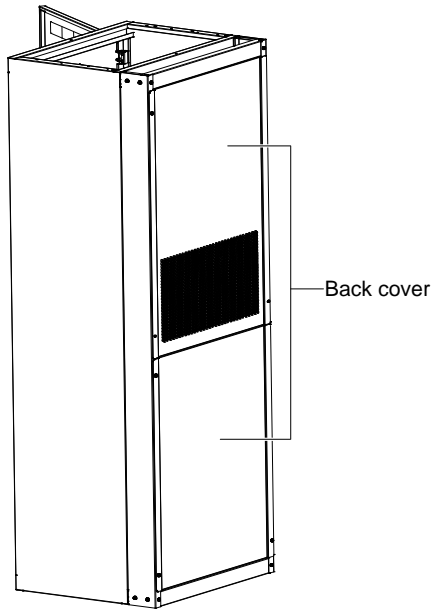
Rear cover plate installation for bottom cabling method (2)
